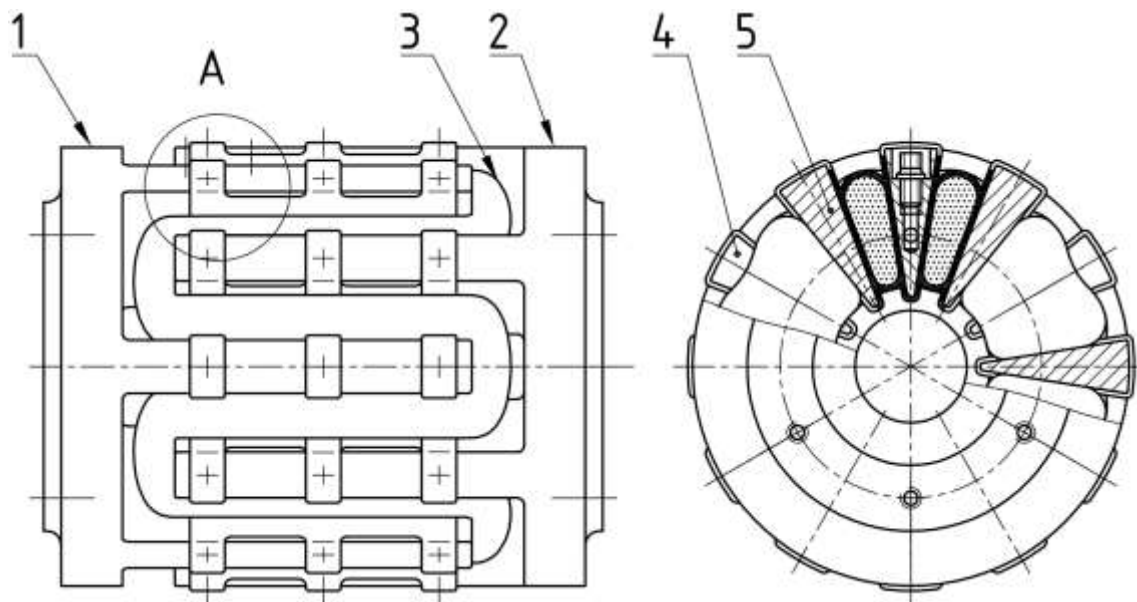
Pneumatic flexible shaft coupling with hose flexible element [19]
